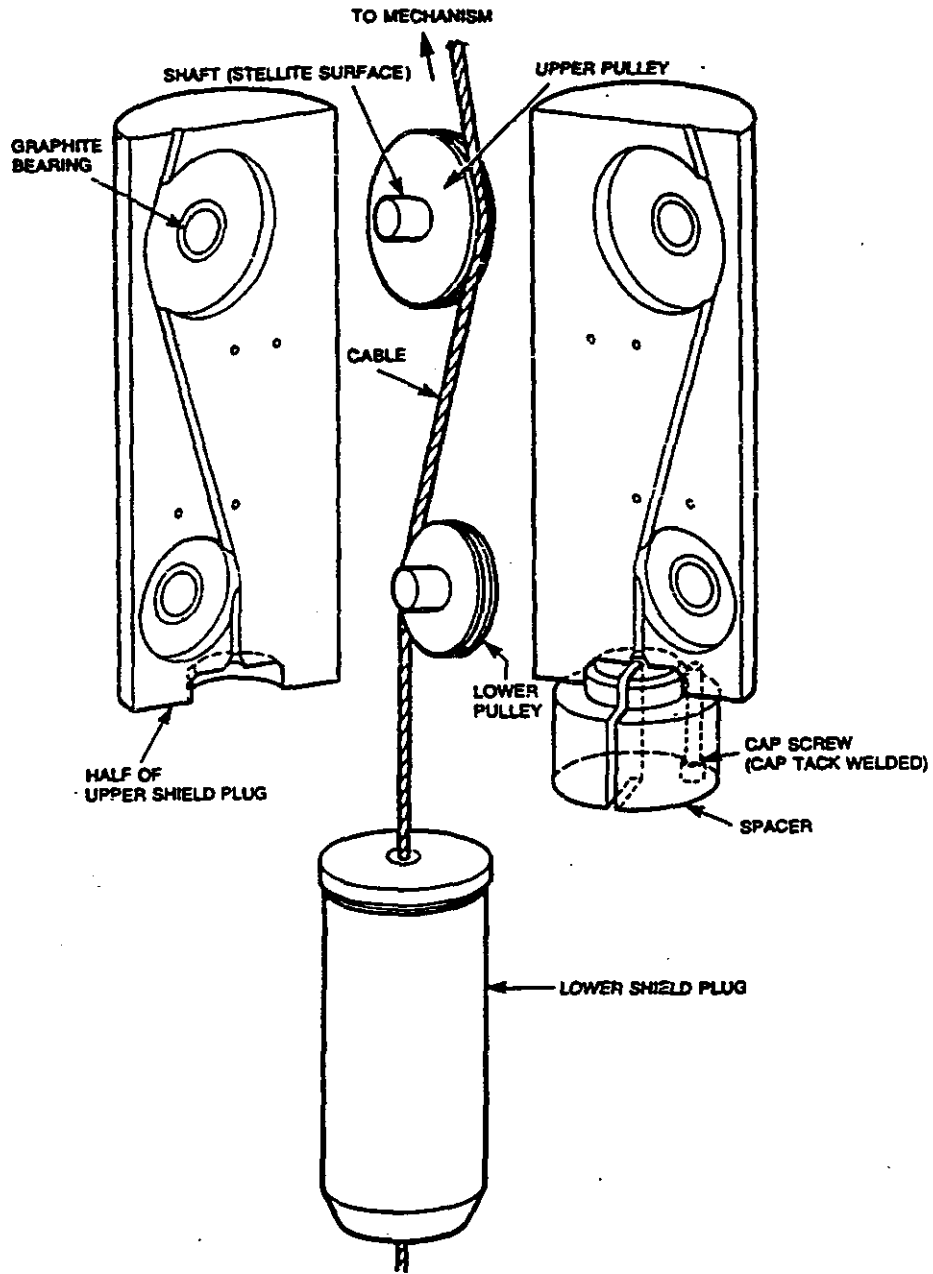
Adjuster Upper and Lower Shield Plugs
